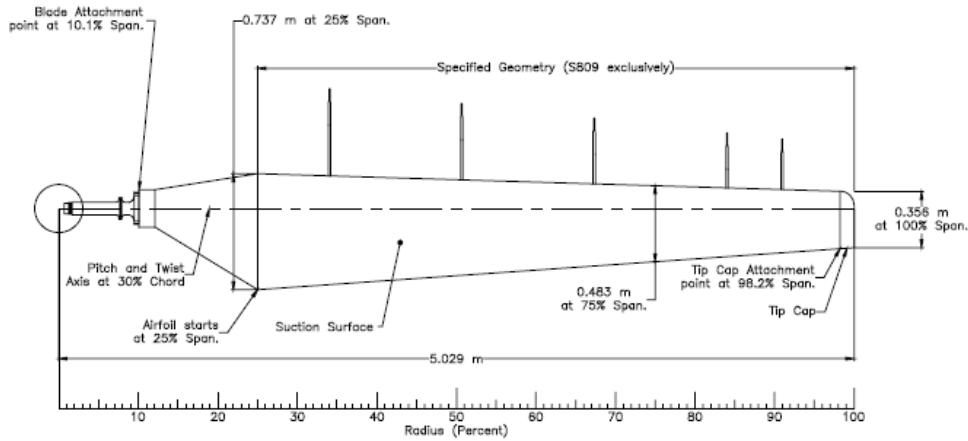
Rotor blade dimensions (Hand et al. 2001)
